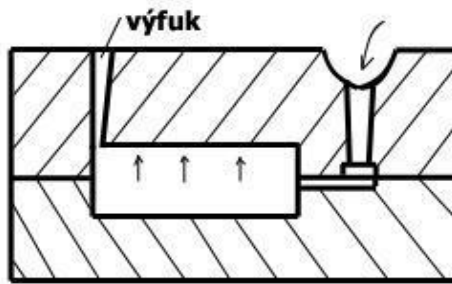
Filling the mould cavity. Výfuk – whistler
